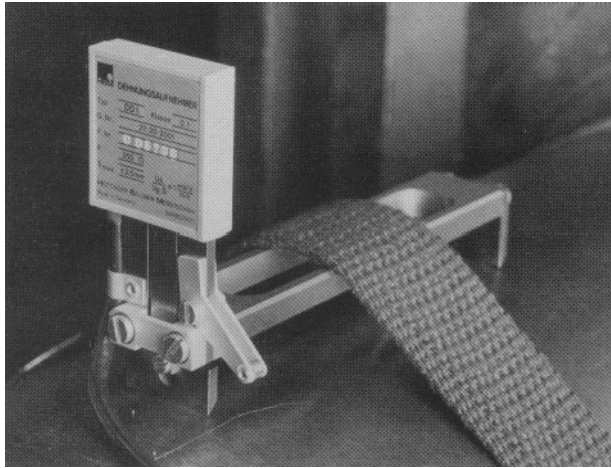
Type DD1 strain transducer clamped to a injection molding machine for measurement of the column force
